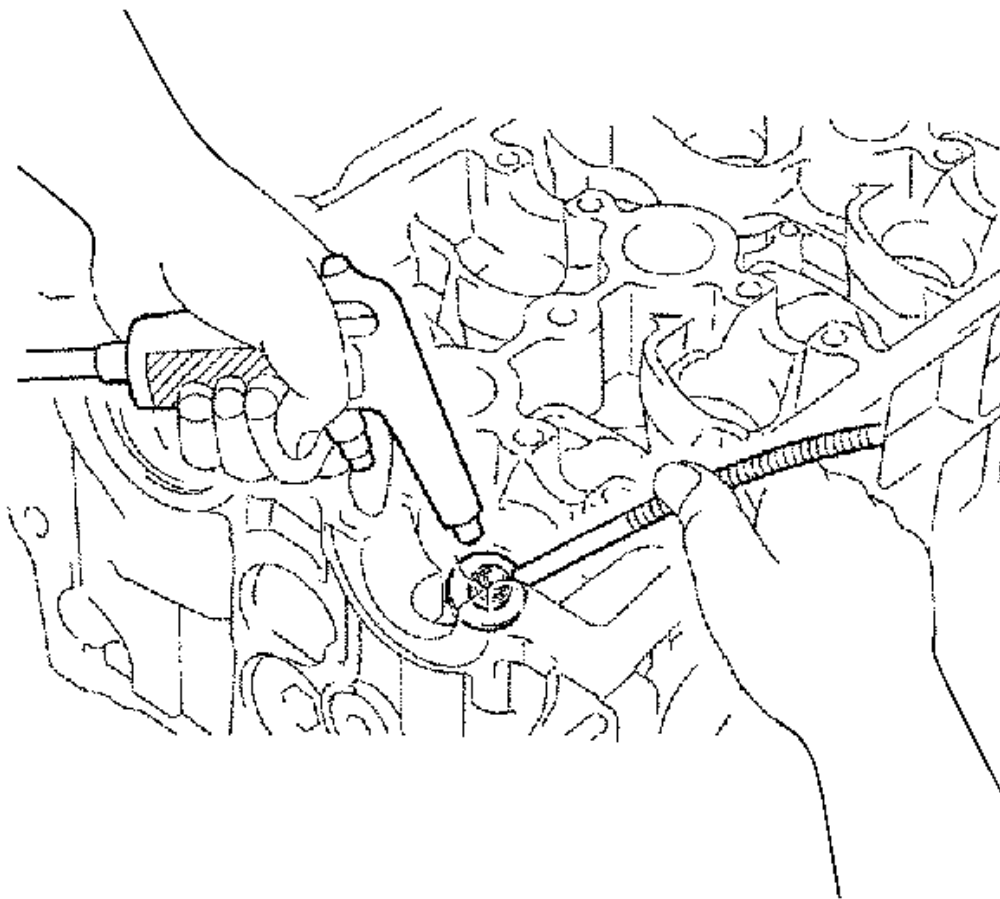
View Of valve spring seat Removal Using Magnetic Tool & Compressed Air
